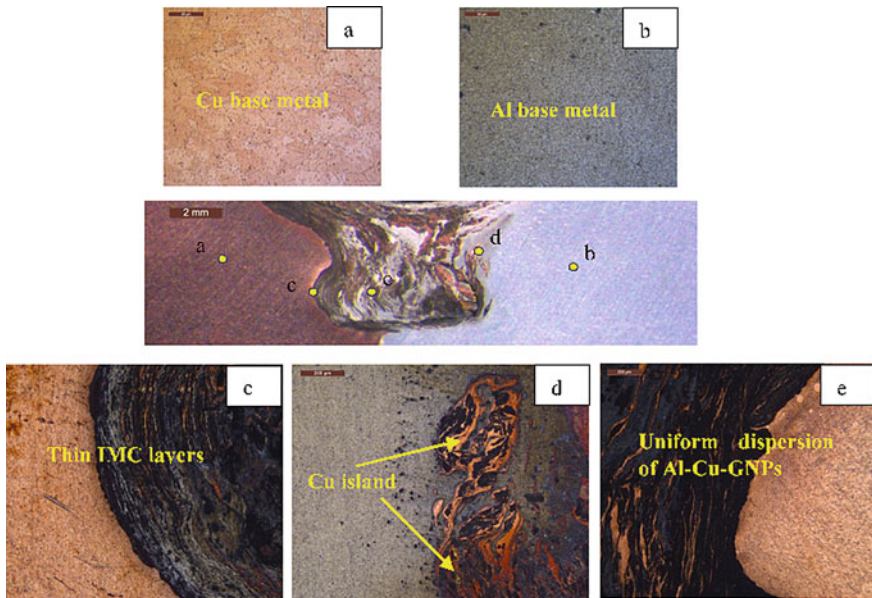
Joint fabricated under EWW-WPO at 14 kN. a Cu base metal, b Al base metal, c Uniform IMCs layers, d Cu island in Al matrix, e Uniform dispersion of Al-Cu-GNPs particles in weld nugget
